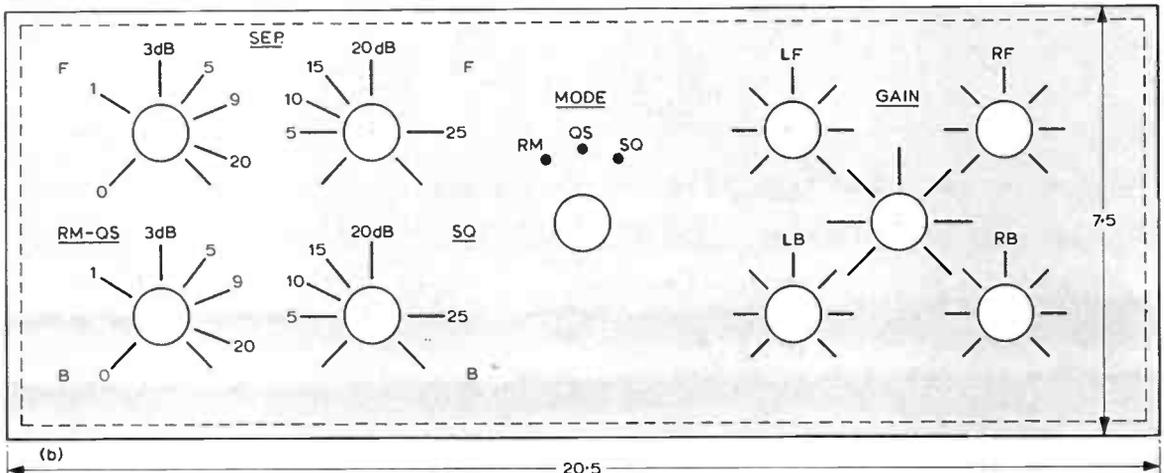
(a): Drilling details of front of chassis tray. Fig. 18(b): Front panel layout.
